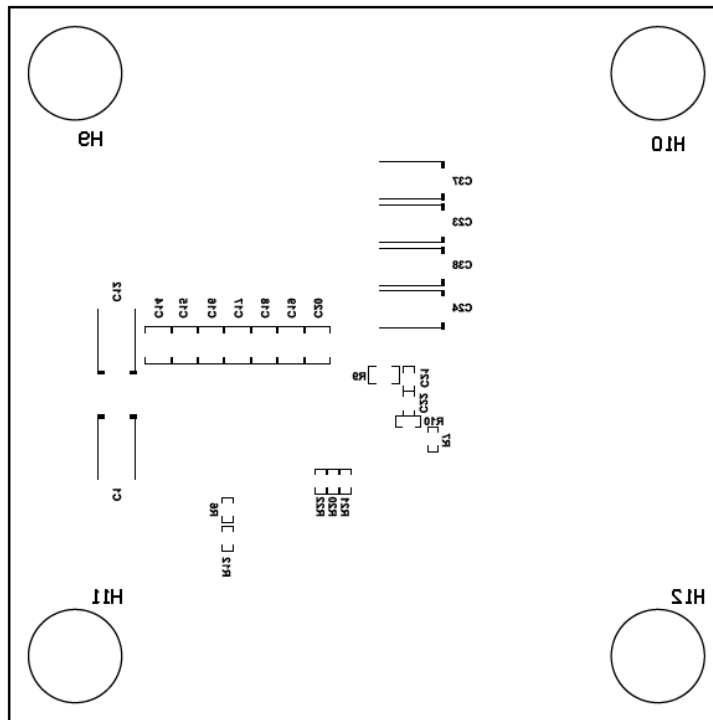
PWR-784EVM Bottom Overlay Layer (Top View)
